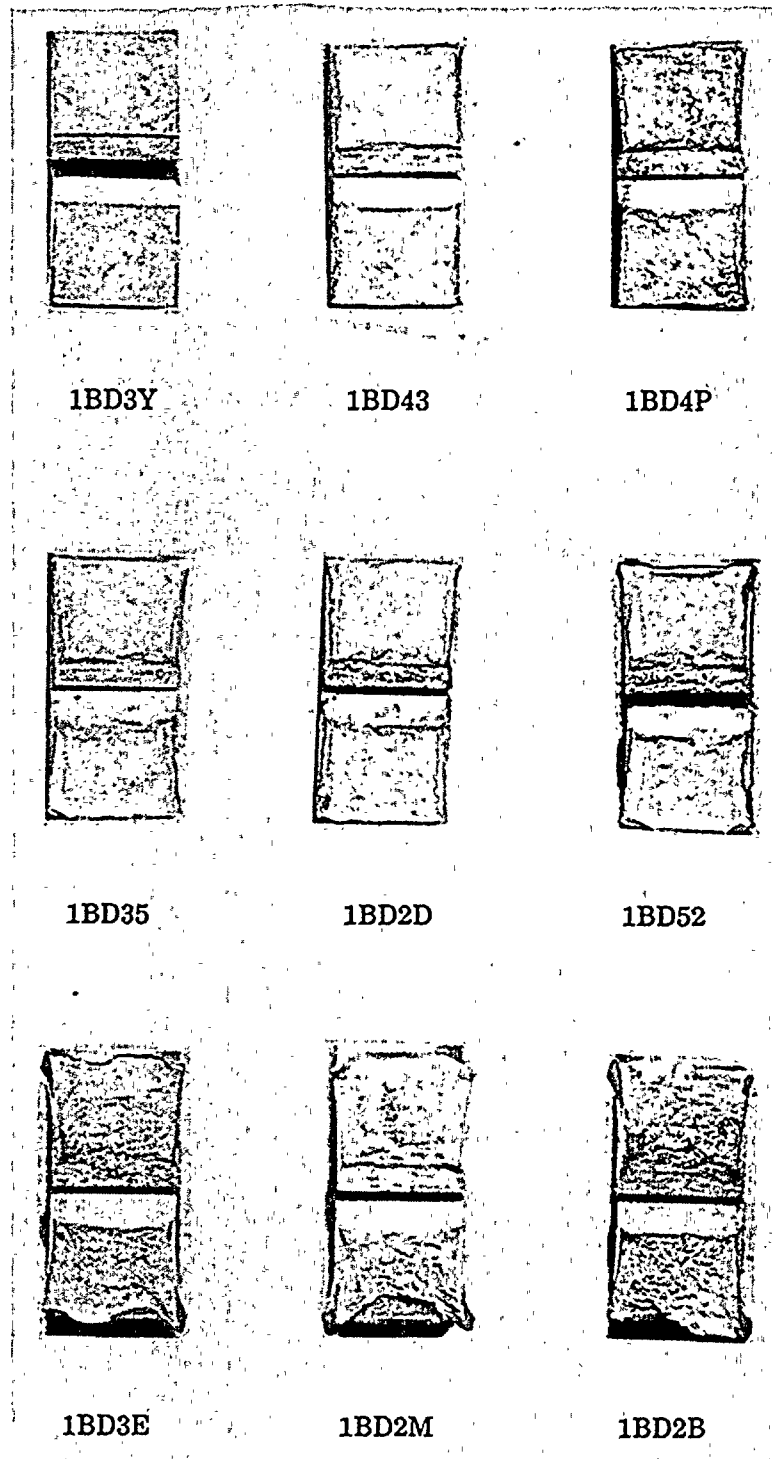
Charpy Impact Specimen Fracture Surfaces for Palo Verde Unit 2 SRM
